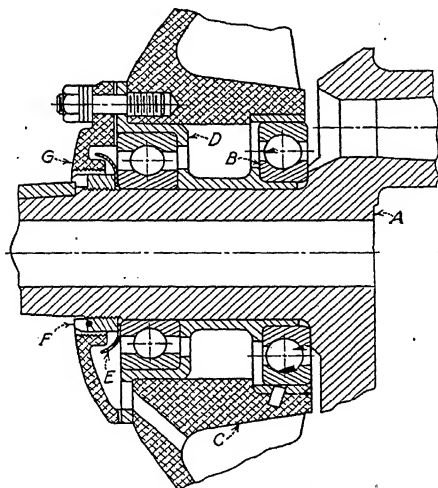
Front main and thrust bearing arrangement of Leblond, model 5-F.
